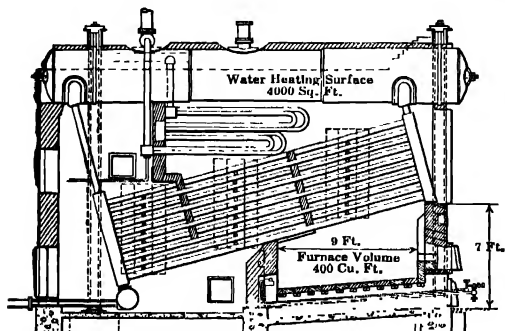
Hammel Oil Burning Furnace — Low Setting, Steam Atomizer.
